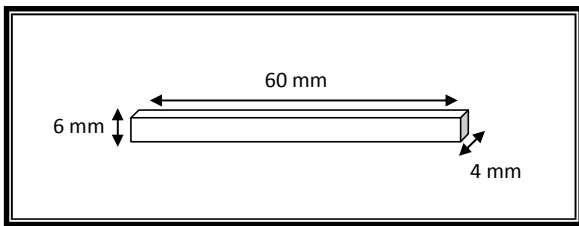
Dimensions of Impact Test Specimens. [11] [ISO-179 TYPE D]
